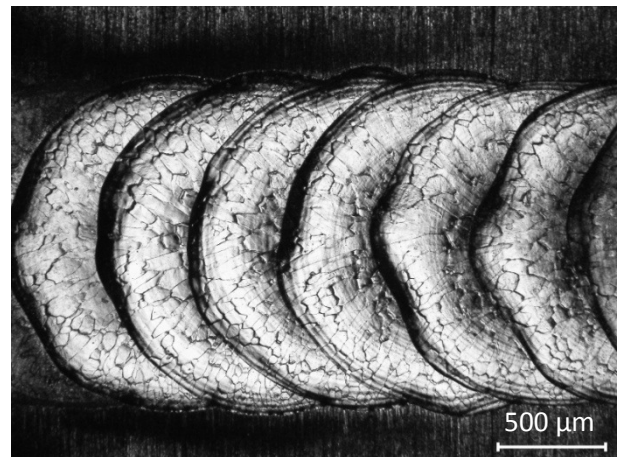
Optical observation of the Ti-6Al-4V bead on plate weld #1 showing top face
